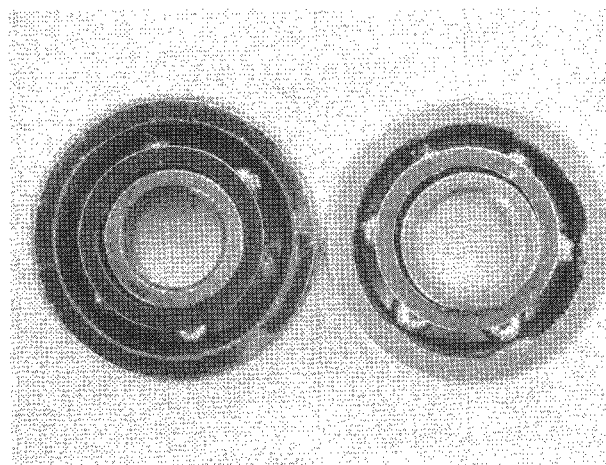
The R-2 size instrument bearing coated with the in situ film. The bearing at left has the coating. Note the difference in color. Mag. 4X; reduced for printing.
